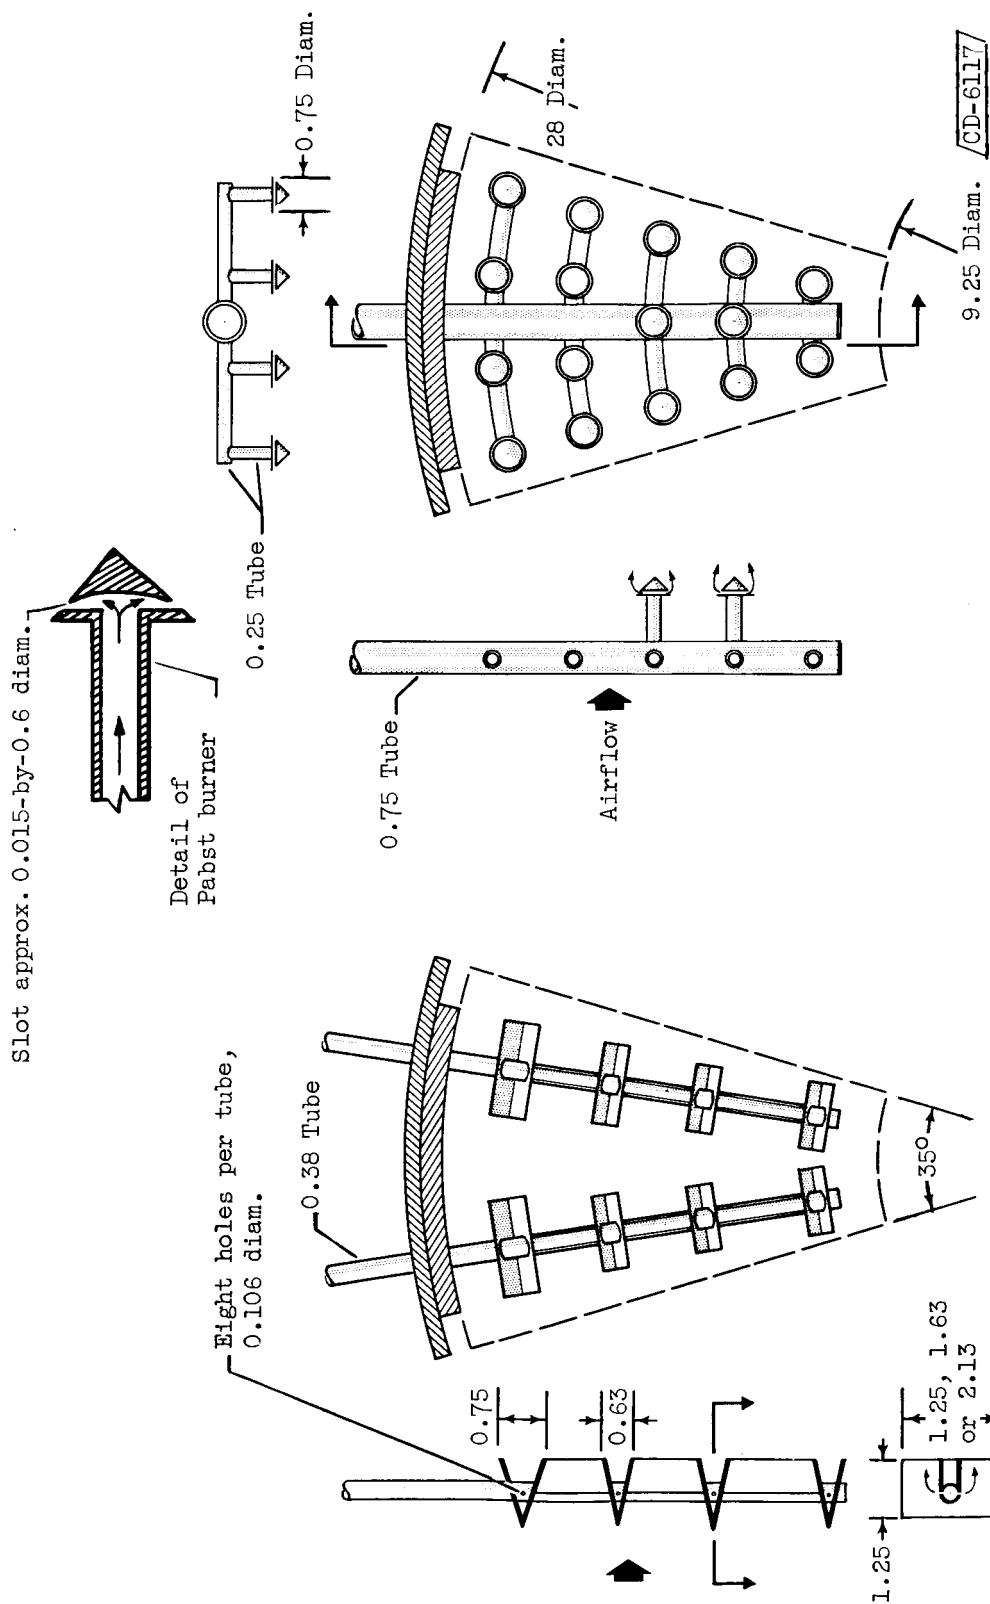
Details of fuel-injector-flameholders used in 350 sector of a 28-inch-diameter afterburner combustor. (All dimensions in inches except where noted.)
